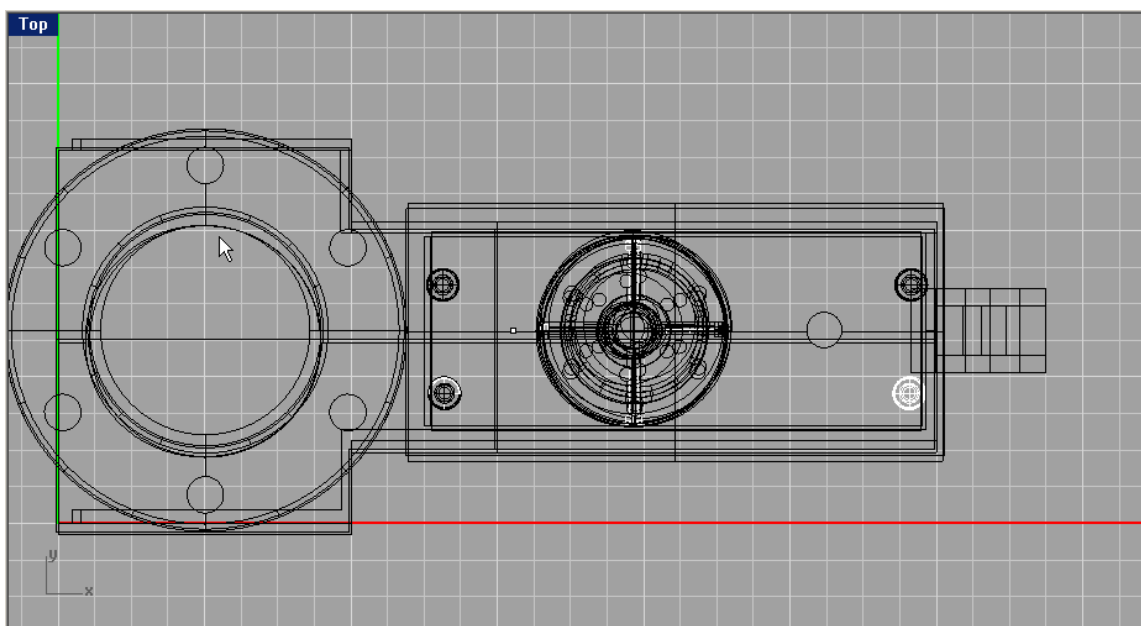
Top view of prototype switch w/ vacuum ion pump pod and w/out magnetic plates.
